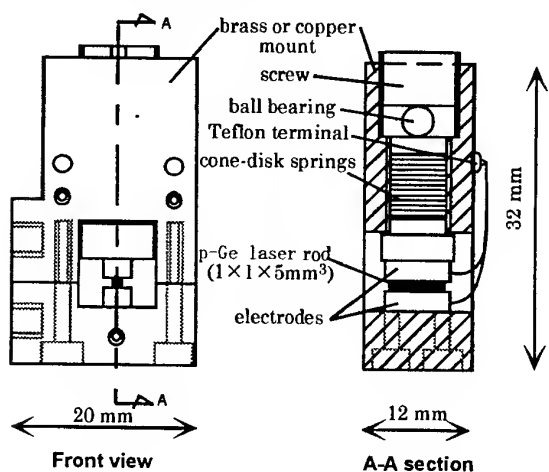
A p-type Ge laser mount which applies the [100] uniaxial stress to the small laser rod.
